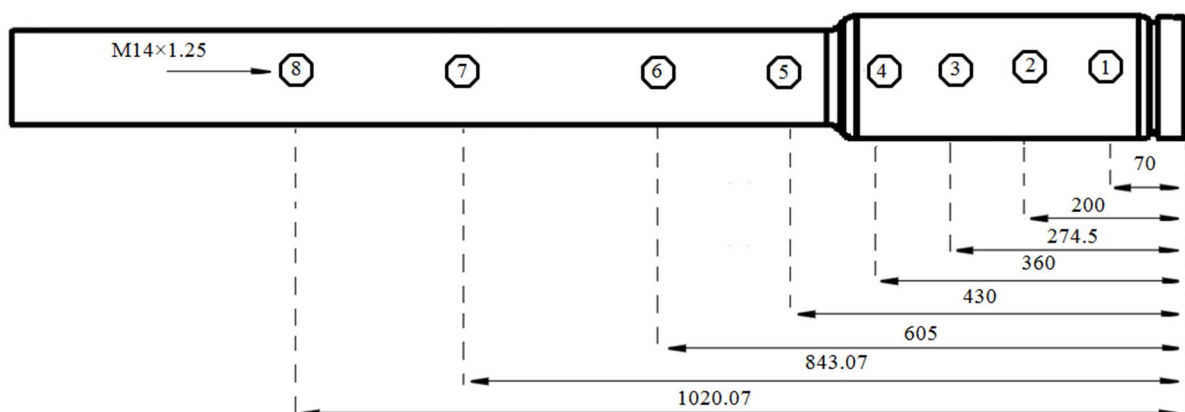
Vessel schematic and the arrangement position of pressure sensors (dimensions in mm) (numbered points show the arrangement of sensors)
